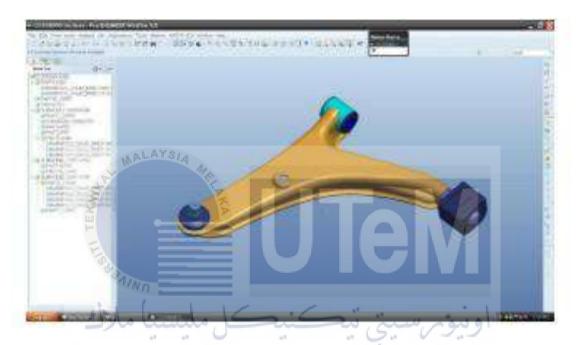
The assembly view of lower control arm (Pachapuri et al., 2021)
